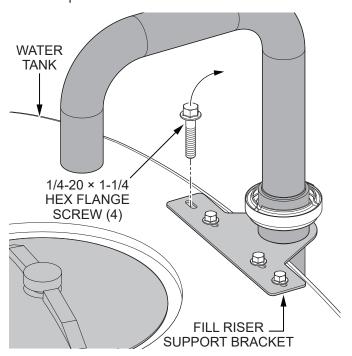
Remove Hex Flange Screws (Front Of Tank)
